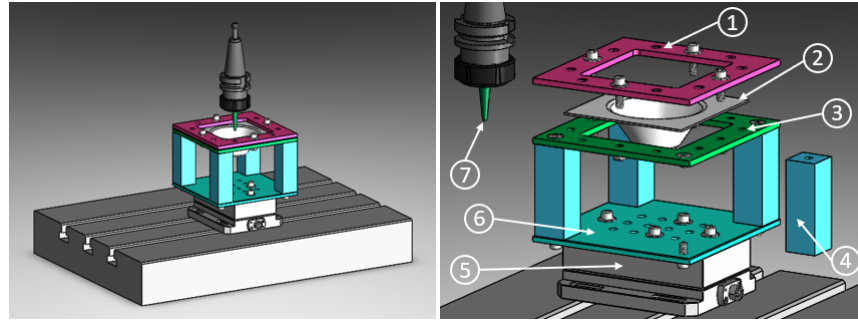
CNC milling machine set up for single point incremental forming process; (1) Top plate; (2) Sheet blank; (3) Clamping plate; (4) Hollow support; (5) Dynamometer; (6) Bottom plate; (7) Forming tool.
